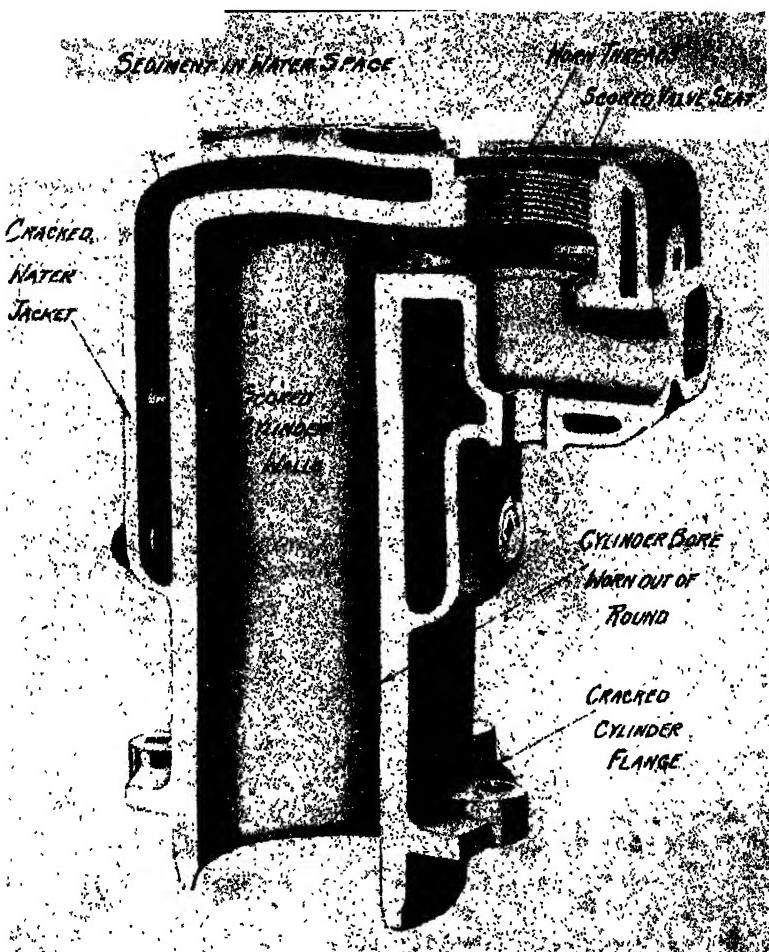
Sectional View of Automobile Engine Cylinder, Showing Defects that Will Reduce Engine Efficiency.
